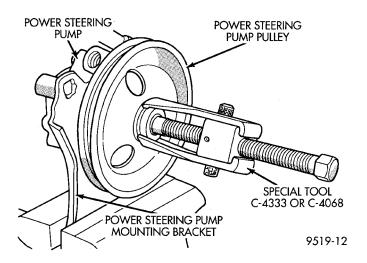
Pulley Removal From Power Steering Pump Shaft
